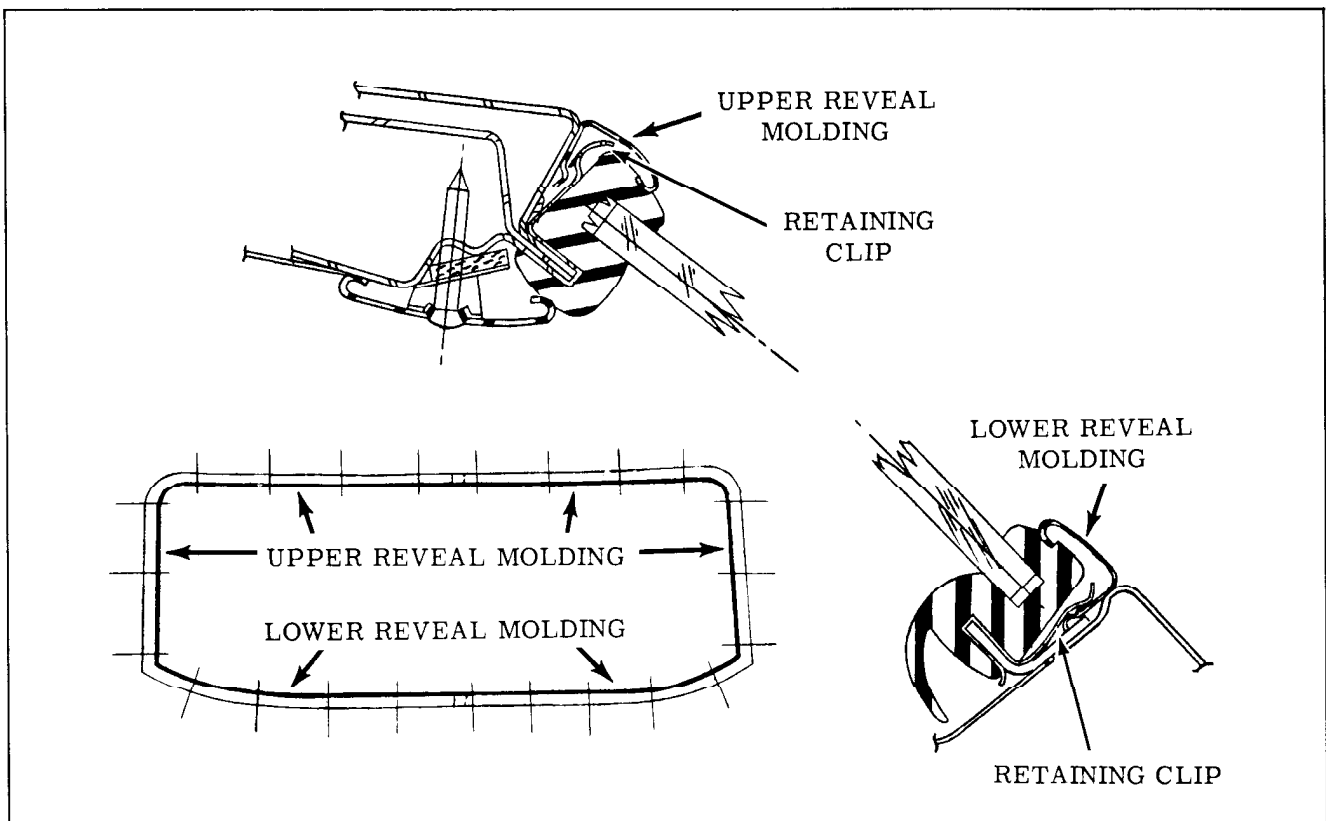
Back Window Reveal Moldings ("37" Styles)
